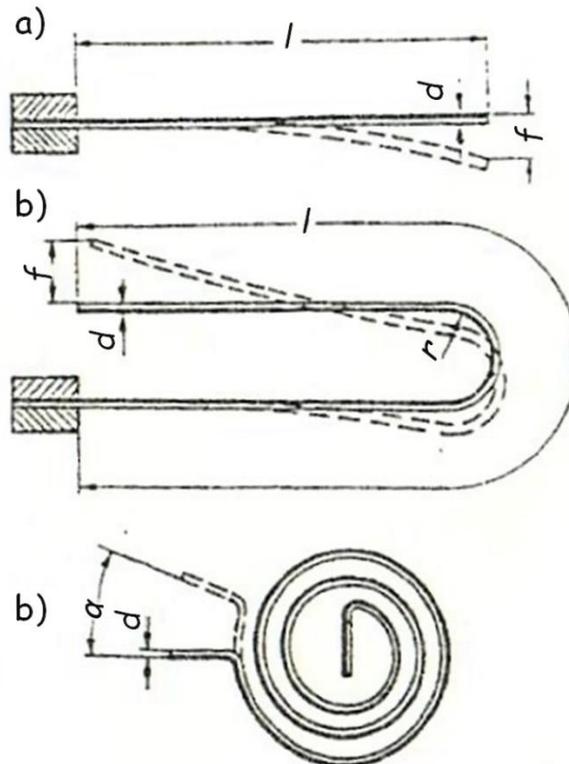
The most common shapes of bimetals: a) flat tape; b) U-shaped tape; c) flat spiral.
